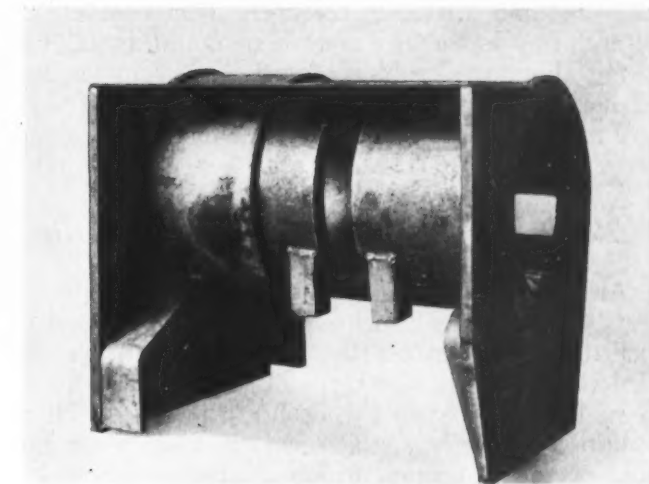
Welded Structure that is More Economical to Manufacture than the Redesigned Casting Illustrated in Fig. 2
